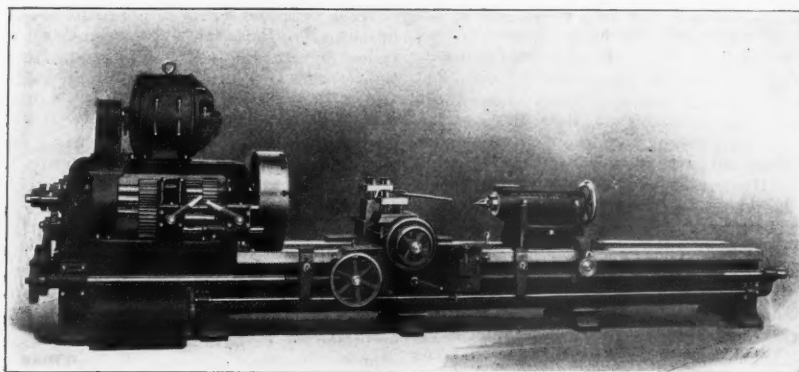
The Pond 30-in. Rapid Reduction Lathe.
